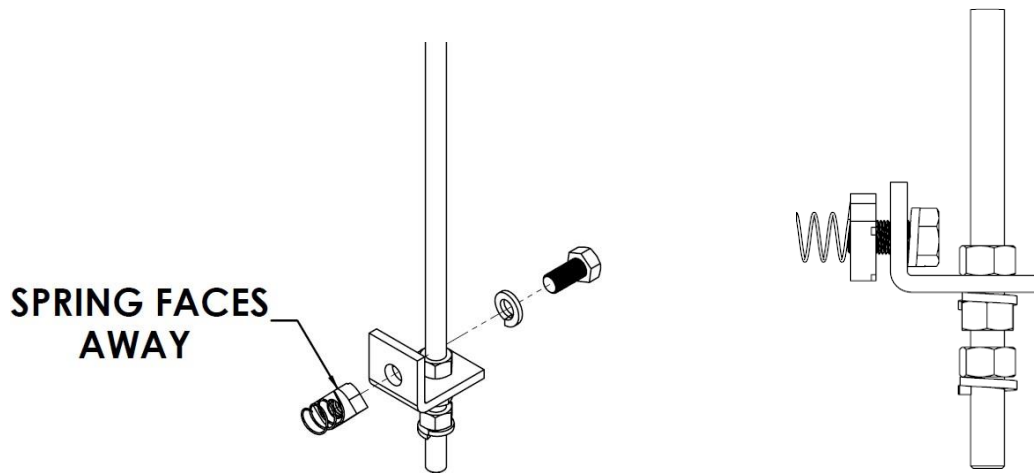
Loosely Thread the Strut Channel Nut on the Bolt with the Spring Facing Away From the 90° Strut Fitting
